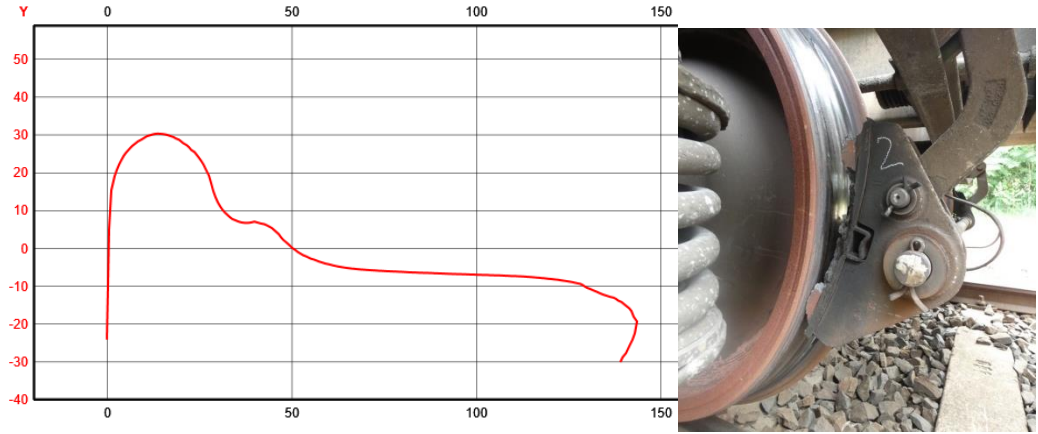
Damaged profile and brake block of one wheel braked with an LL - IB116* brake block
